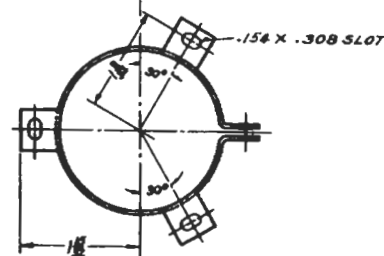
Transformers and Reactors, Winding Data and Dimensional Drawings (Drawing T-7607754)
